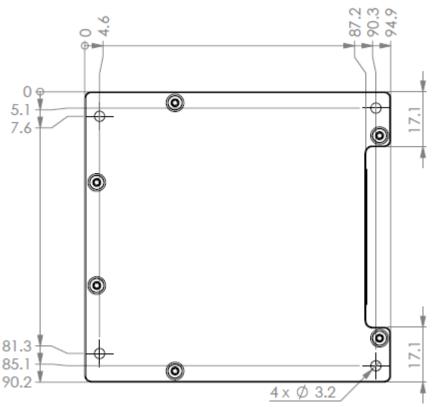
Mechanical Drawing of NANOlink-boost-dp - Top view
